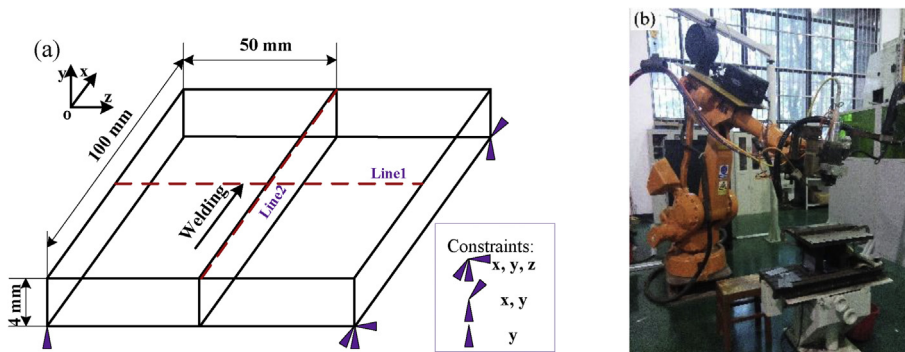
Laser welding EH36 steel: (a) butt joint and (b) experimental system.
